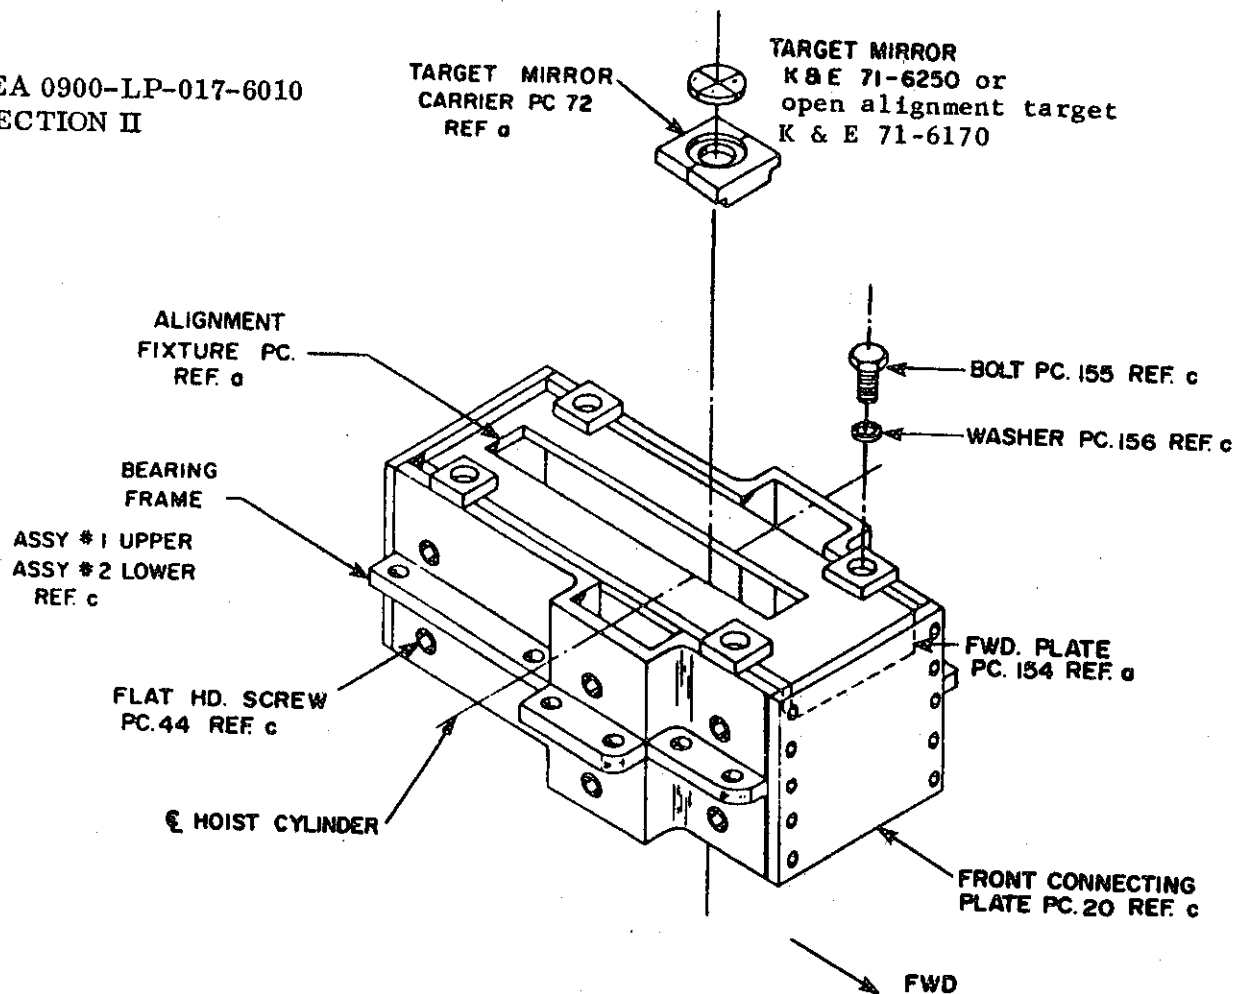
Positioning Alignment Fixture on Bearing Frame Top.
